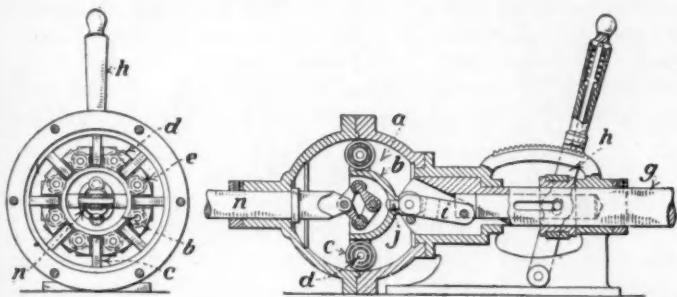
END ELEVATION, PARTLY IN SECTION, AND A LONGITUDINAL SECTION OF A SINGLE-SPHERE HEAVY-DUTY TYPE TRANSMISSION
